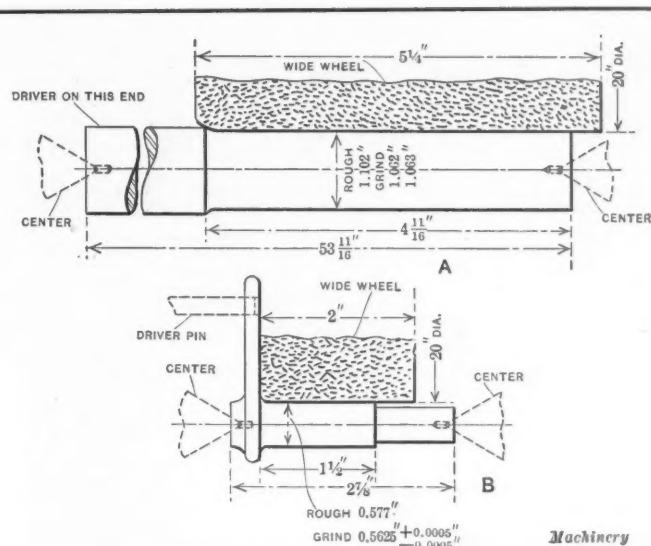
Two Interesting Examples of "Straight-in" Grinding—Automobile Drive Shaft and Automobile Spring Shackle
